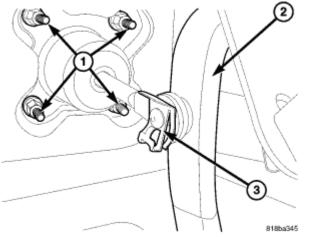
Identifying Retainer Clip, Pedal & Booster Mounting Nuts Courtesy of CHRYSLER LLC
